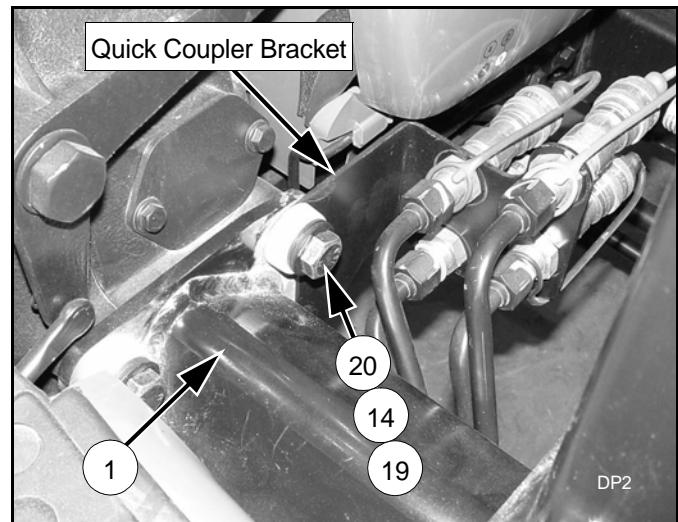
Right Rear Mount and Quick Coupler Bracket Installed
